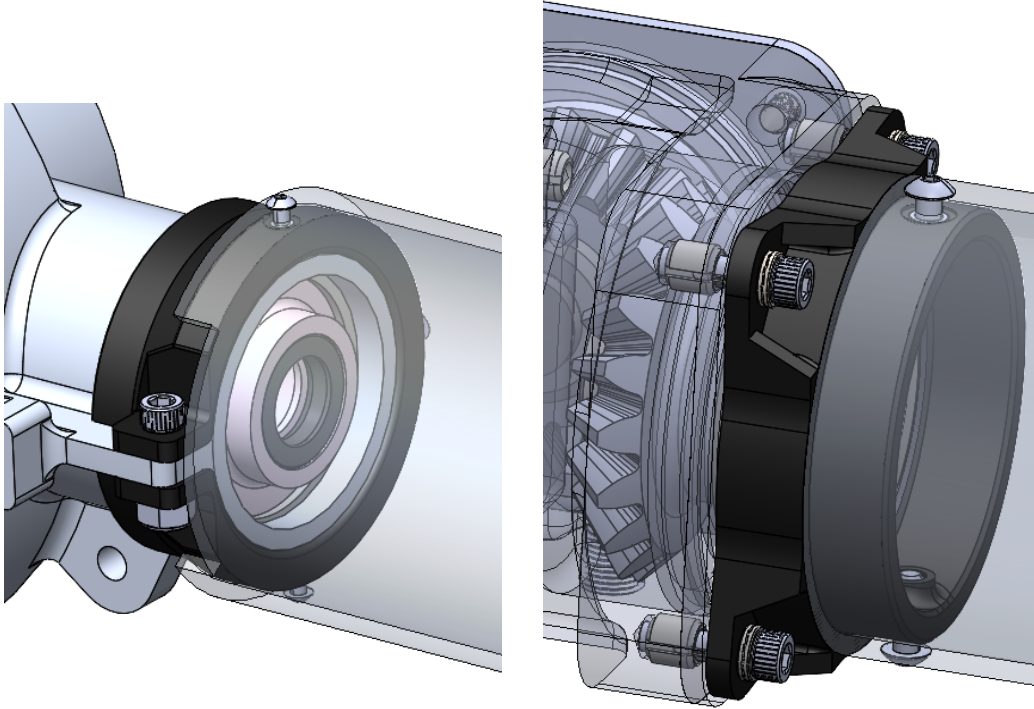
Front gearbox (left) and bevel box (right) interfaces
